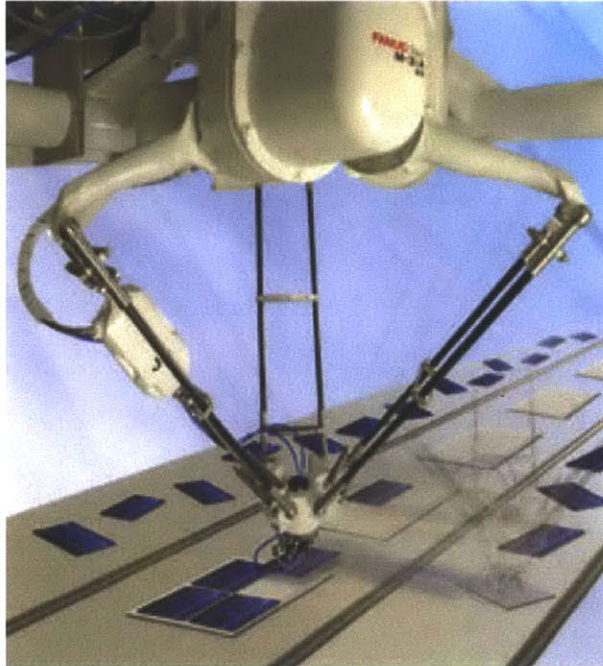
6 axes robot integrated with machine vision used in solar cell manufacturing [22]
